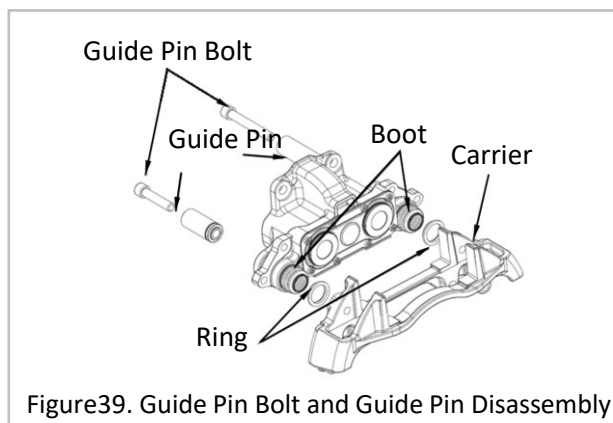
Guide Pin Bolt and Guide Pin Disassembly
